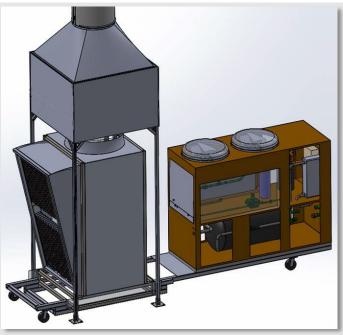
Overall Hybrid Condenser and Chiller Test System Layout
